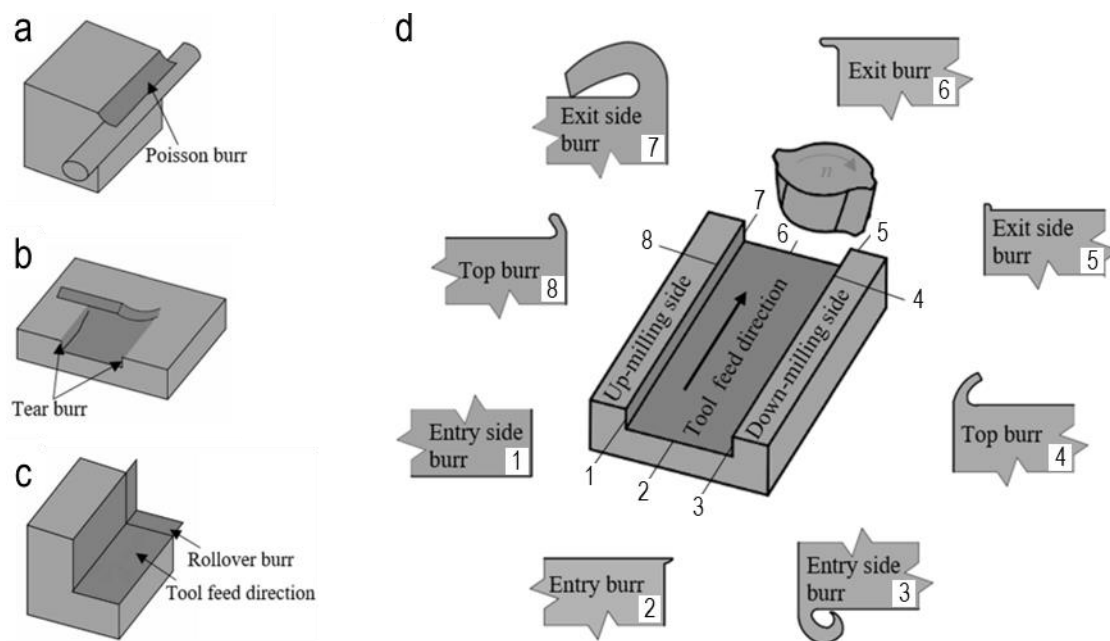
different burr formation mechanisms: a) Poisson, b) Tear, c) Rollover, d) different burr types in the slot-milling process [61].
